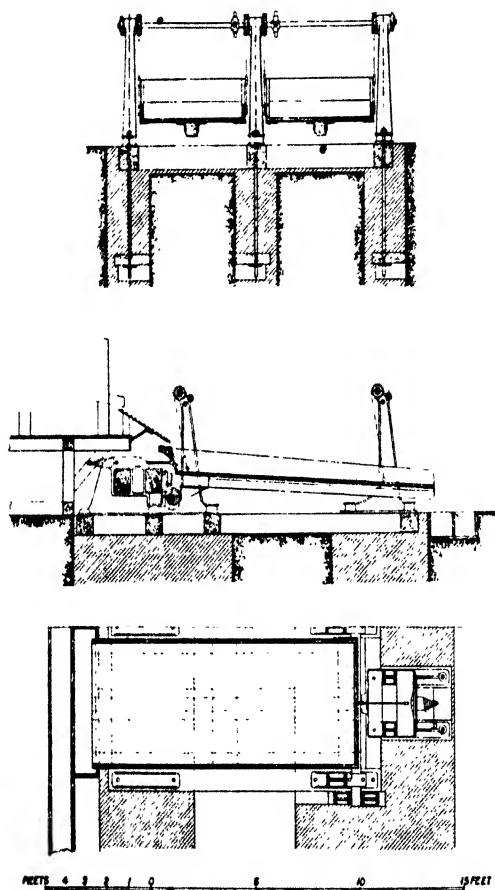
Salzburg table. Plan, vertical section and end elevation.
